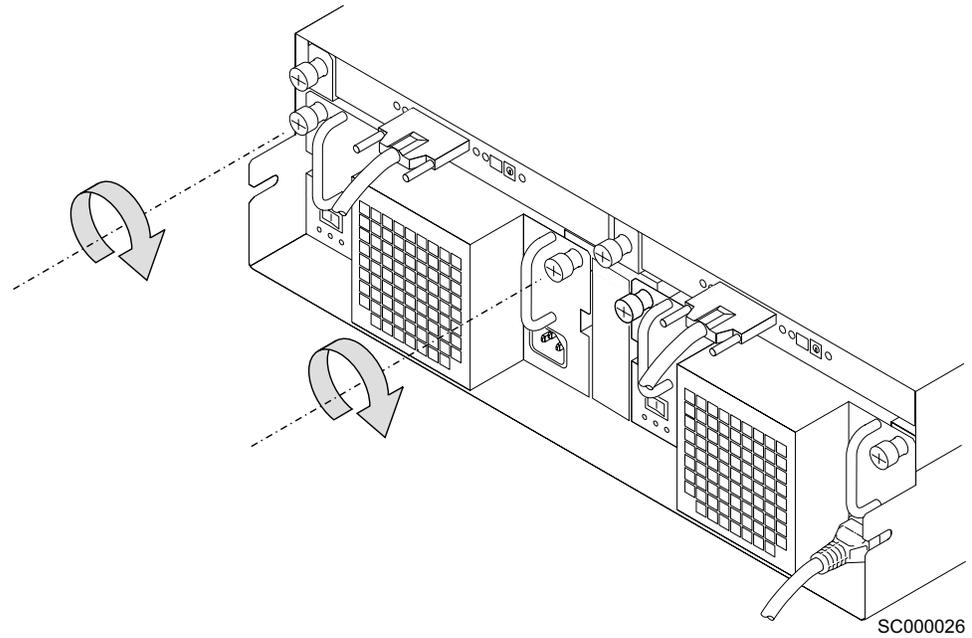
Tightening the screws on a fan-and-power-supply assembly
